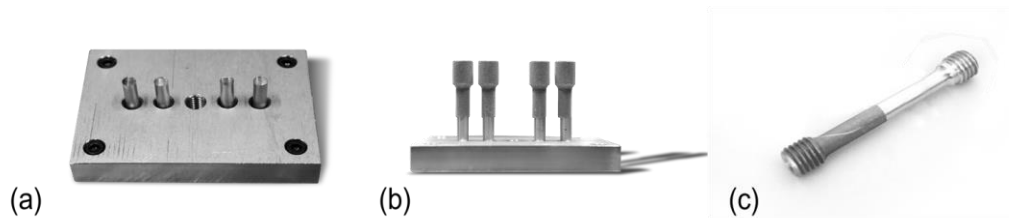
Specimens building process. a) Half specimens (cast metal) are screwed to adapter with threaded holes. b) Specimens after building c) Specimens after machining to final dimensions.
